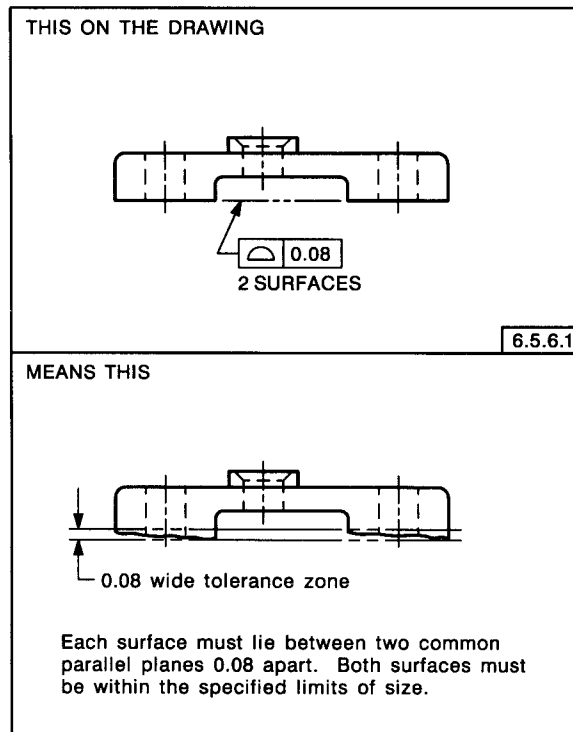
SPECIFYING PROFILE OF A SURFACE FOR COPLANAR SURFACES
